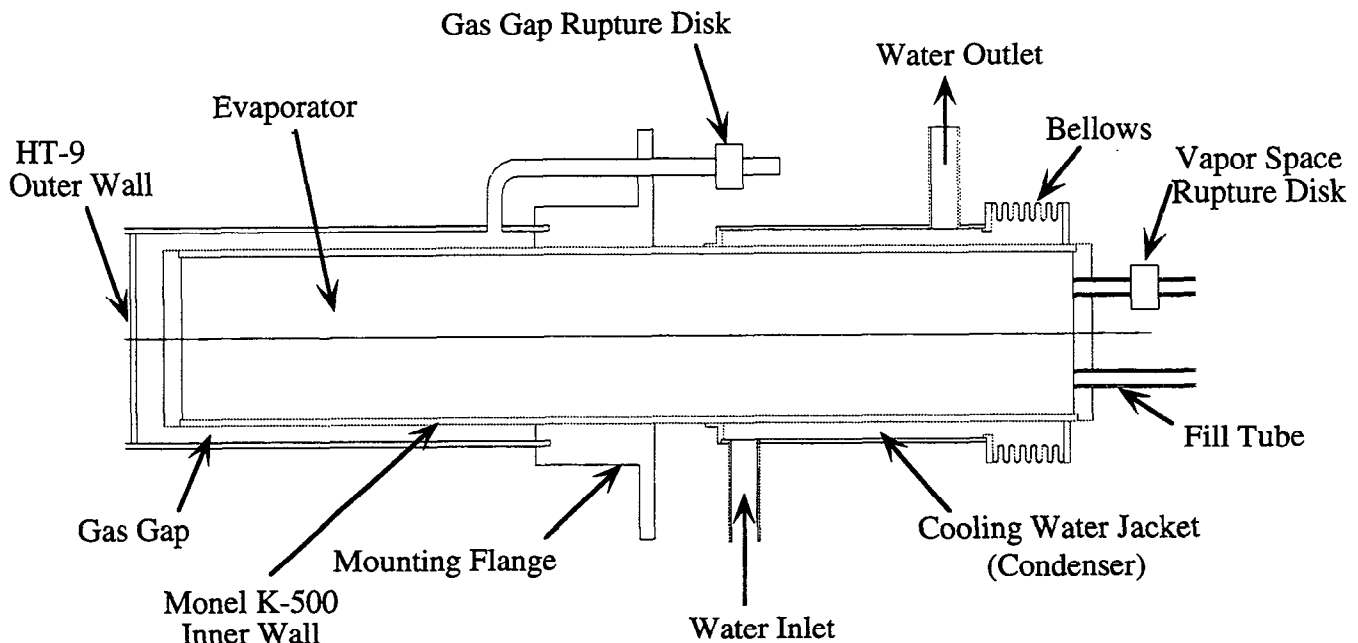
Cross Sectional Drawing of the SINQ-ESS Target Cooler Heat Pipe
